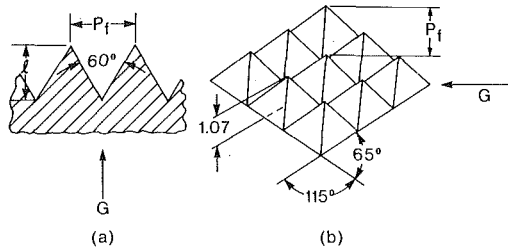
Details of the rough tubes: (a) V-thread tube and (b) knurled tube
